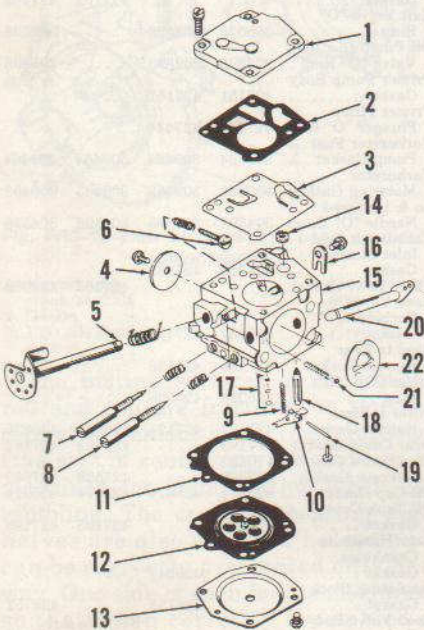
Exploded view of Tillotson HS carburetor. A check valve is installed at location (17) on models equipped with a fuel primer pump instead of the choke shown at (20, 21 & 22).
